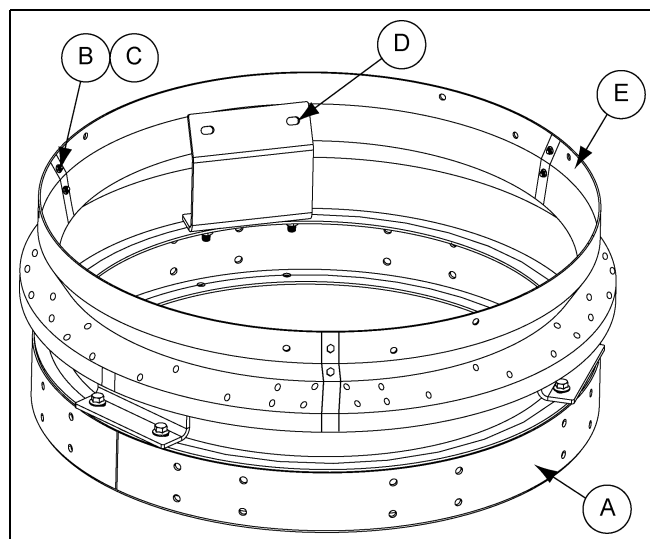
H Attaching the Center Collar to Peak Ring Weldment
